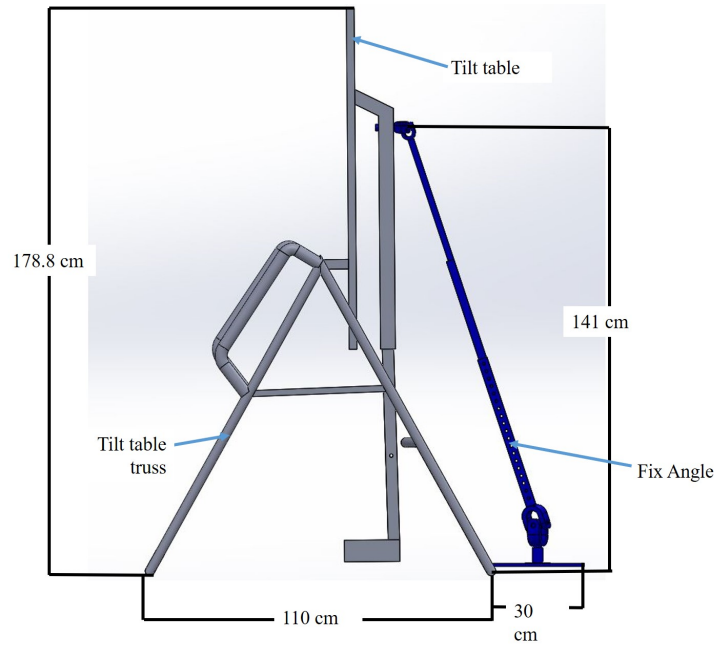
Side view of the SOLIDWORKS CAD model of the tilt table and the fix angle device set to 90°, with relevant dimensions
